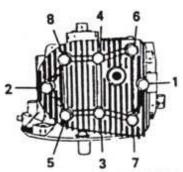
On Models VM70, HM70, VH70 and HH70, tighten cylinder head cap screws evenly to a torque of 180 in.-lbs. (20 N·m) using tightening sequence shown.
